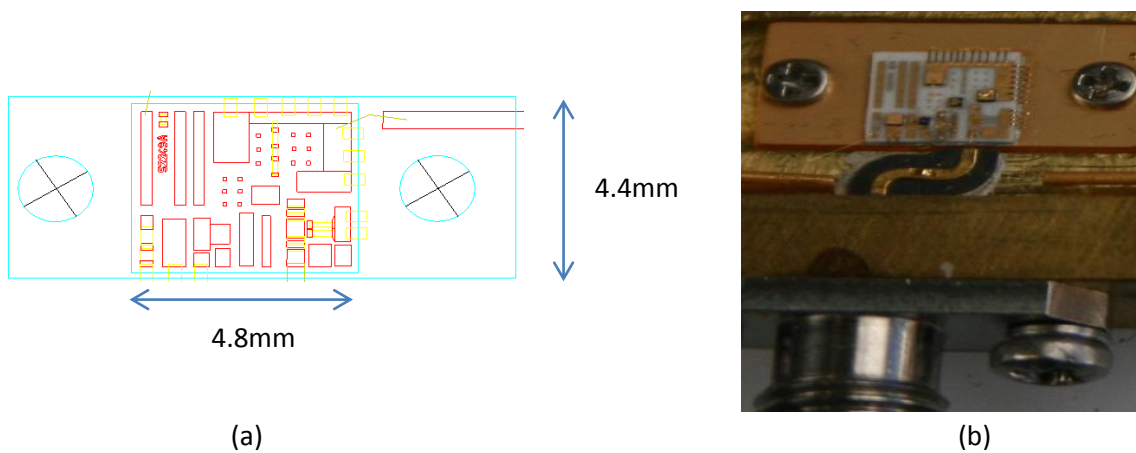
VCO Prototypes: (a) drawing design of mask on a carrier (b) physical build
